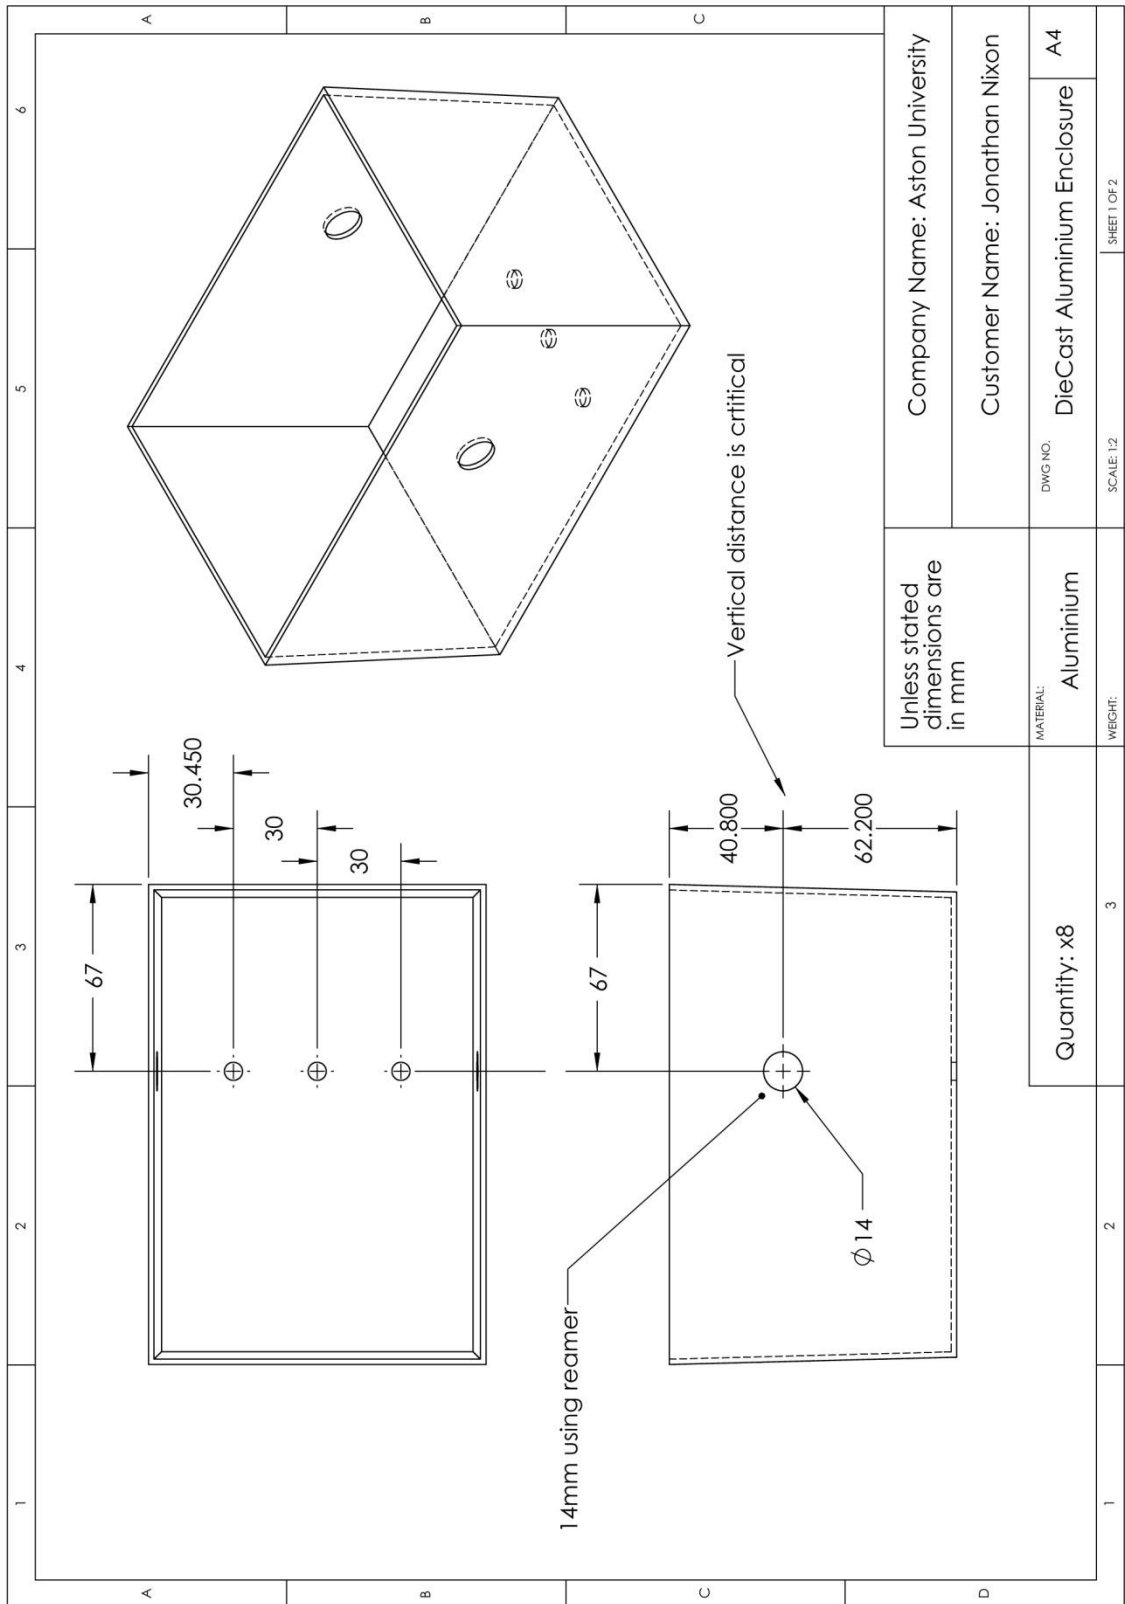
Engineering drawing for the die cast aluminium enclosure.
